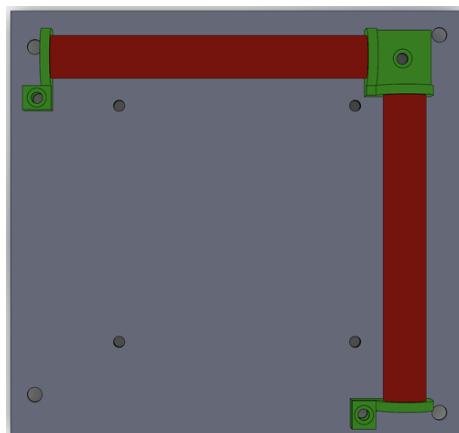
Top view of magnetorquer PCB showing the two metal core magnetorquers
